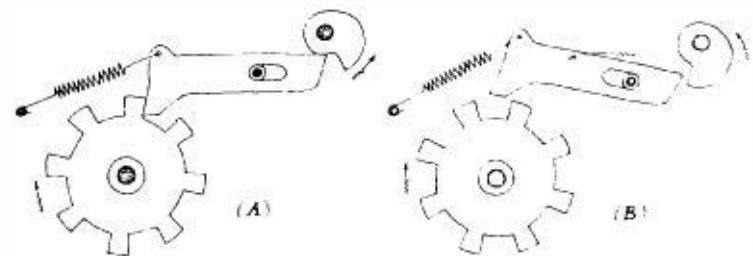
Single-pallet machine escapement. (A) Engaged. (B) Disengaged.
